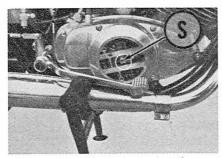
View of clutch adjustment screw(S) for X-6 models.
